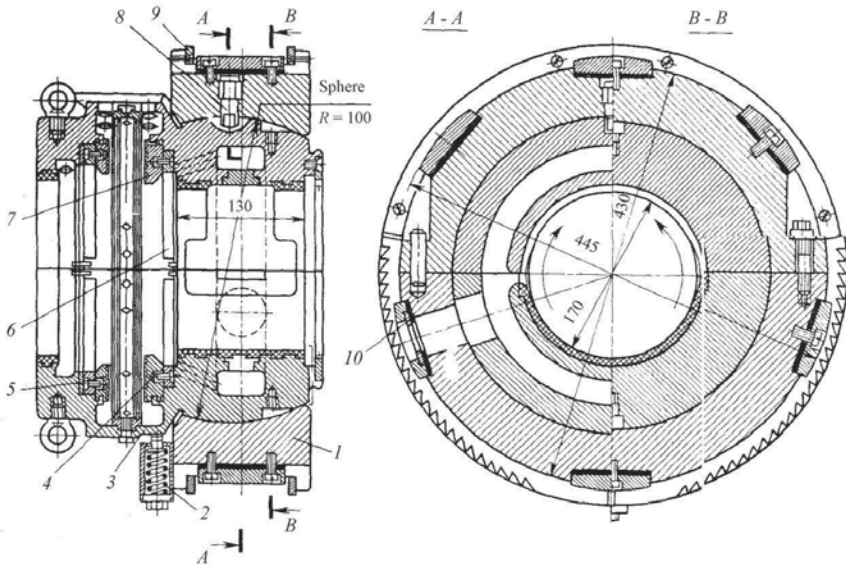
Thrust bearing liner of the Power Machines (LMZ)
